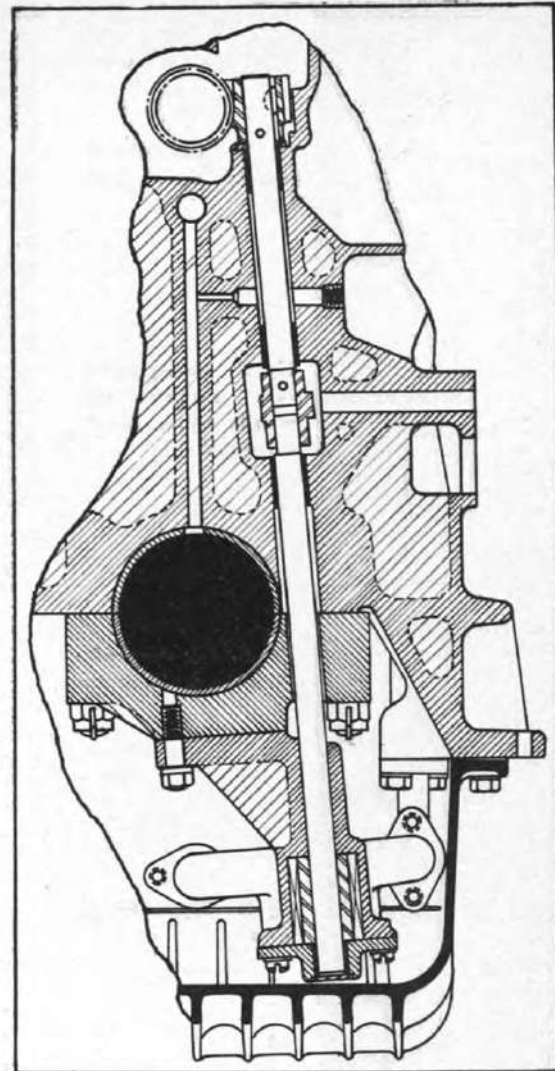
Sectional view showing how oil pump is driven by helical gears from the crankshaft
